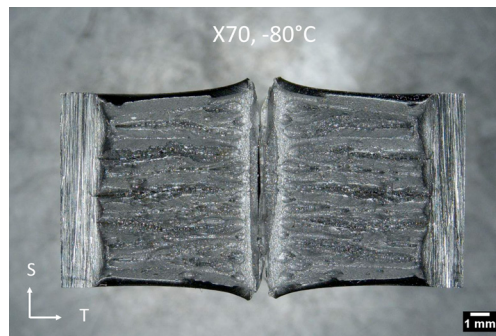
Fracture surface of Charpy specimen of X70 material at lowest test temperature (-80°C). The crack-divider type of split is evident.
